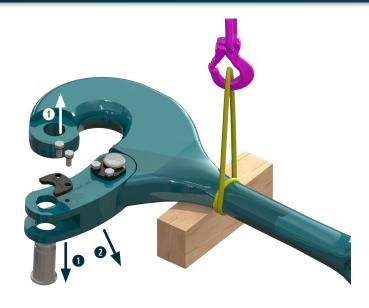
Mounting the LE2 to the Elevator Link, Step I
